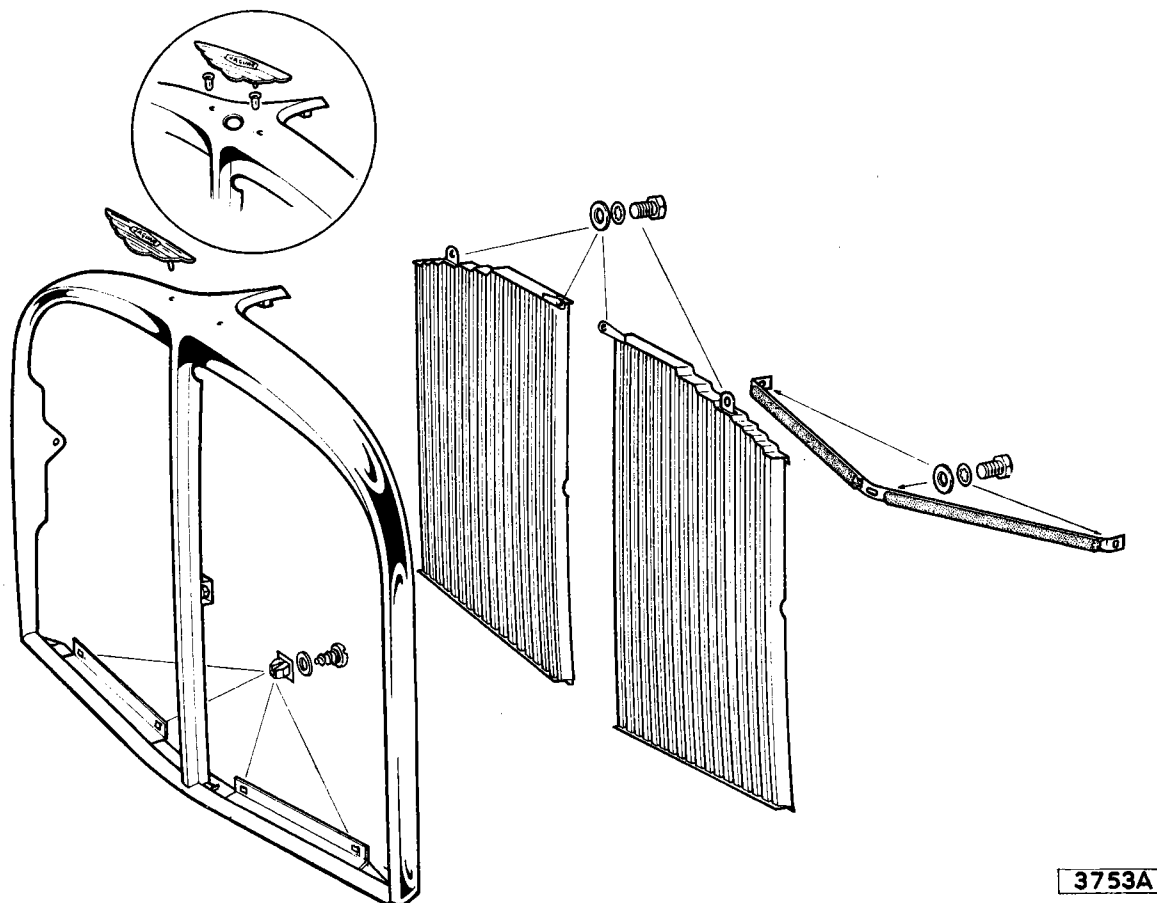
The radiator grille dismantled. Inset shows the top fixing on later cars.
